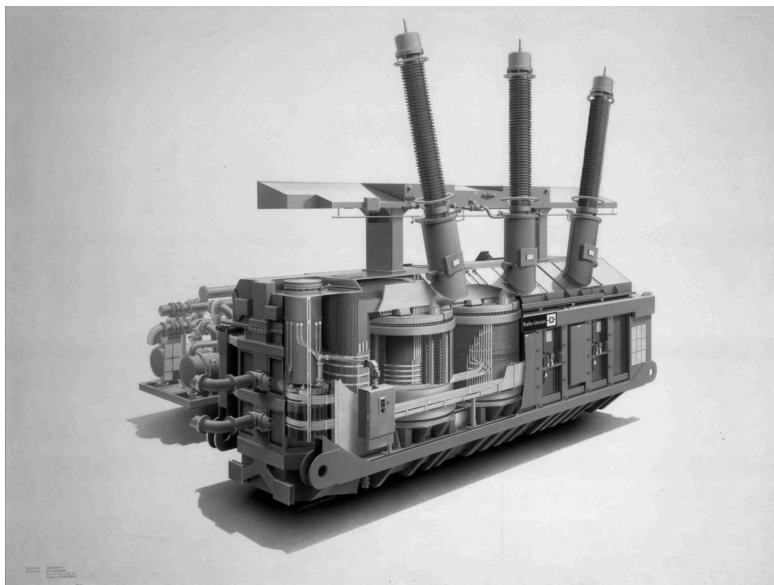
A typical core and coil assembly of a three-phase, core-type, power transformer. (Courtesy of Siemens AG.)
